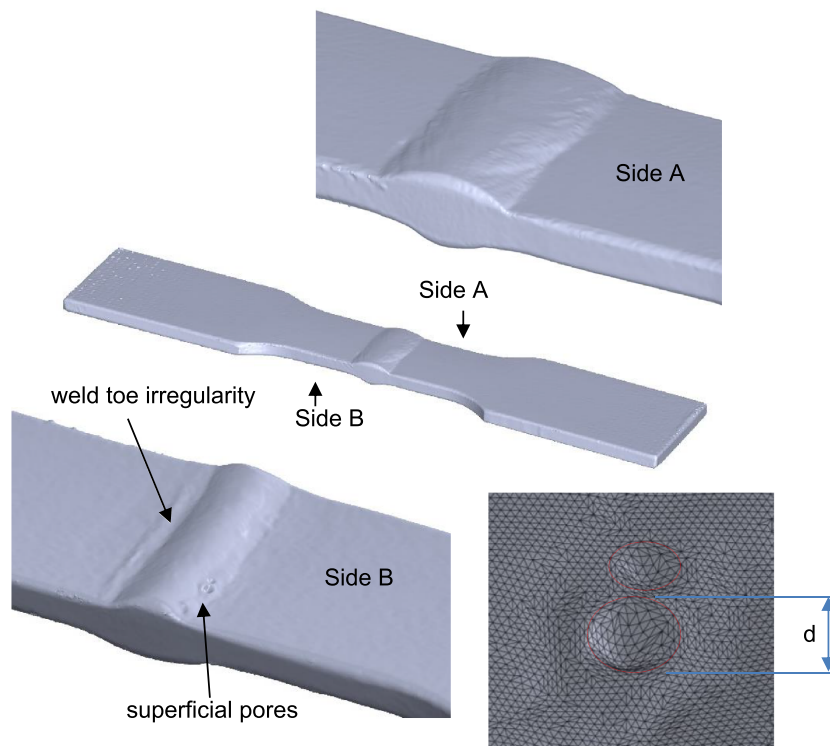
Three-dimensional model of a butt-welded joint obtained with a scanner resolution of about 0.1 mm (size of specimen 168 × 30 × 3 mm; $d \sim 1$ mm) [Colour figure can be viewed at [wileyonlinelibrary.com](https://onlinelibrary.wiley.com/doi/10.1111/ffe.13812)]
